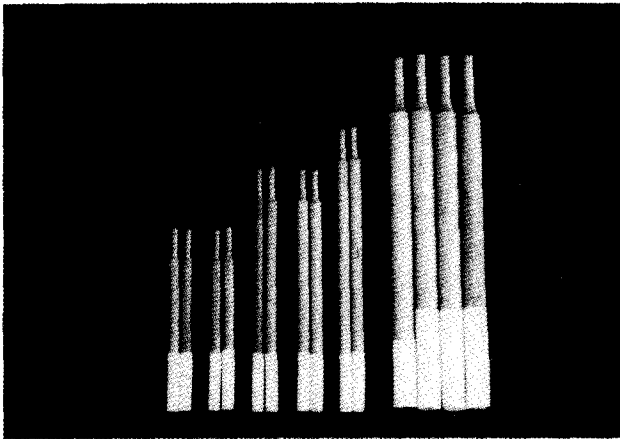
Terminal parts fabricated from 6mm and 12mm MoSi<sub>2</sub> rods. Upper end is machined to 3mm and 6mm for welding to heating zone of same diameters. Bottom end is thermal-sprayed aluminum of about 400 μm thick.
